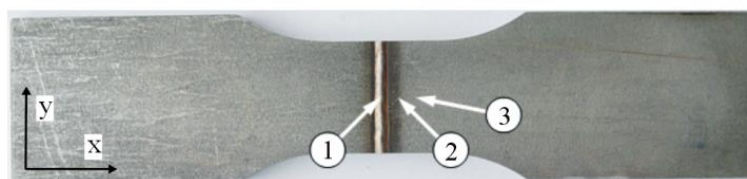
Schematic of residual stresses measurement in laser weldment
